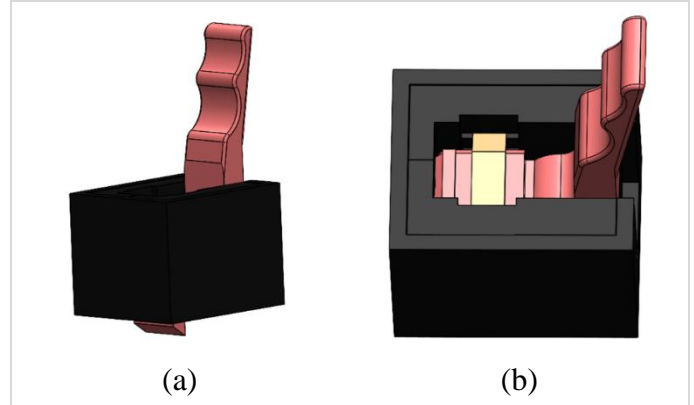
Different Views of the Box Locking Mechanism Assembled
